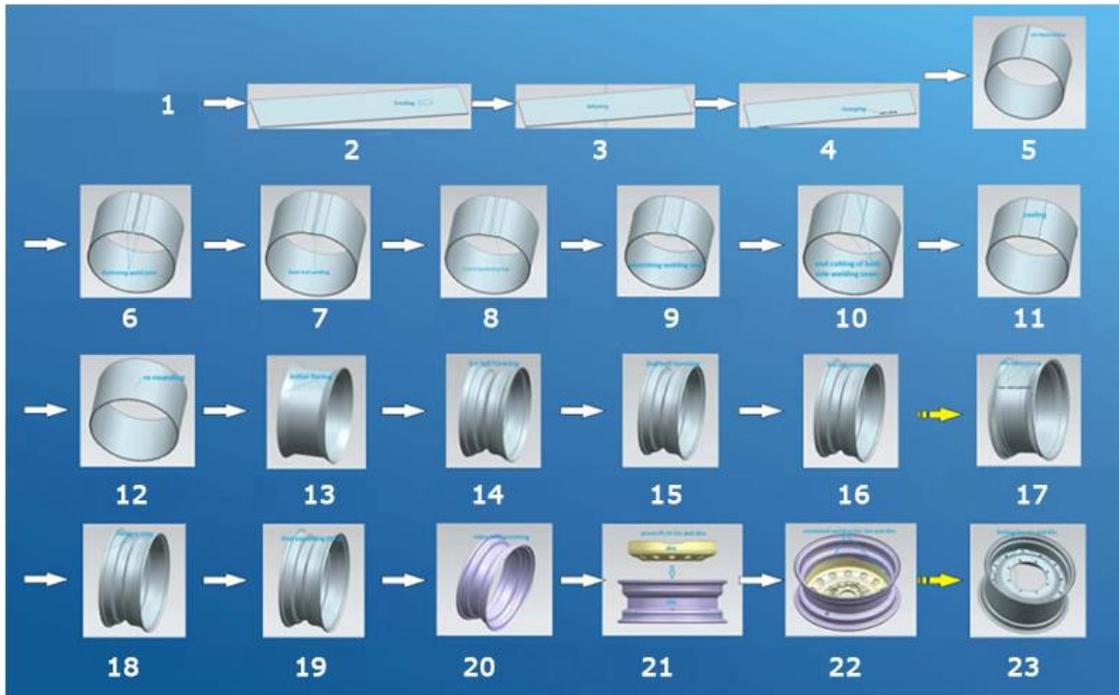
Roll forming process of a steel car rim. 1: Low carbon steel strip cut to length. 2: Rim band feeding. 3: Deburring of both sides. 4: stamping mark. 5: Rim band coiling. 6: Flattening of the weld joint. 7: Flash butt welding. 8: Trimming the welding slag. 9: Planishing. 10: End cutting. 11: Cooling. 12: Re-rounding. 13: Initial flaring. 14: 1st roll forming. 15: 2nd roll forming. 16: 3rd roll forming. 17: 4th roll forming for non-skid pattern. 18: Edge flanging. 19: Final expanding. 20: Valve hole punching. 21: Press disc into rim. 22: Combined welding for rim and disc. 23: Bolting rim and disc. (Wheelmachinery)
